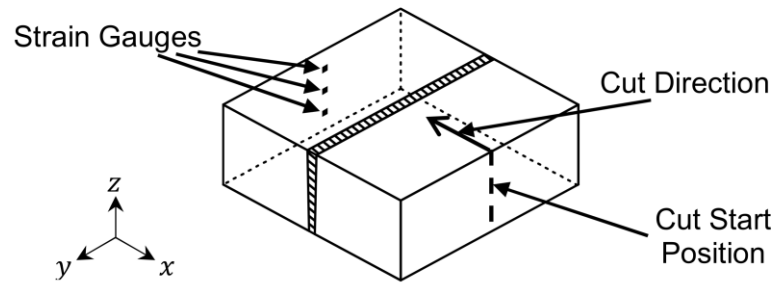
EBW4 C(T) blank showing strain gauge locations for slitting
